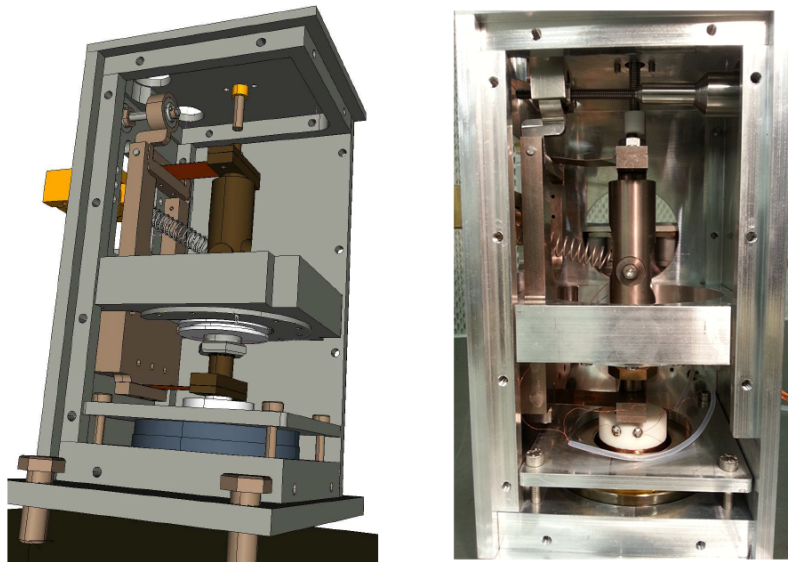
3D technical drawing (left panel) and internal view (right panel) of the cryogenic vertical accelerometer. On the upper part of the right side picture it is visible the stepper motor screw acting on the spring blade. The external box has dimensions $104 \times 98 \times 183.5 \text{ mm}$.
